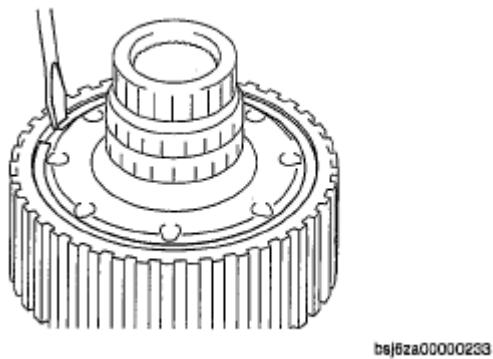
Installing Snap Ring To Rear Planetary Ring Gear
